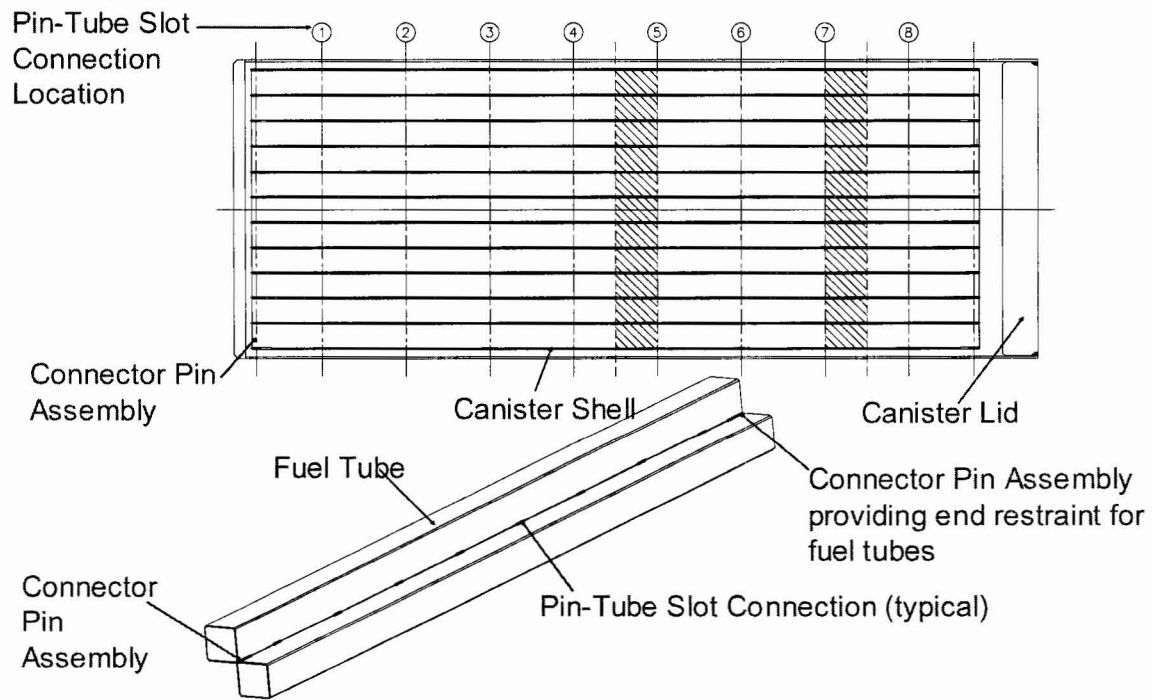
Locations of the Pin Assemblies for a Typical Basket
